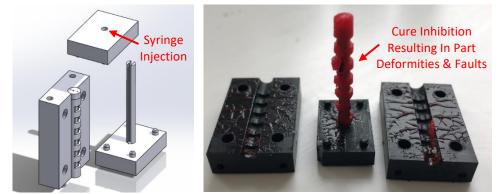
Developed Mould (Left) & Failed Silicone Casting: Cure Inhibition & Part Faults (Right)
